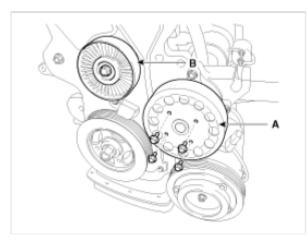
Identifying Water Pump Pulley And Drive Belt Idler Courtesy of HYUNDAI MOTOR AMERICA
